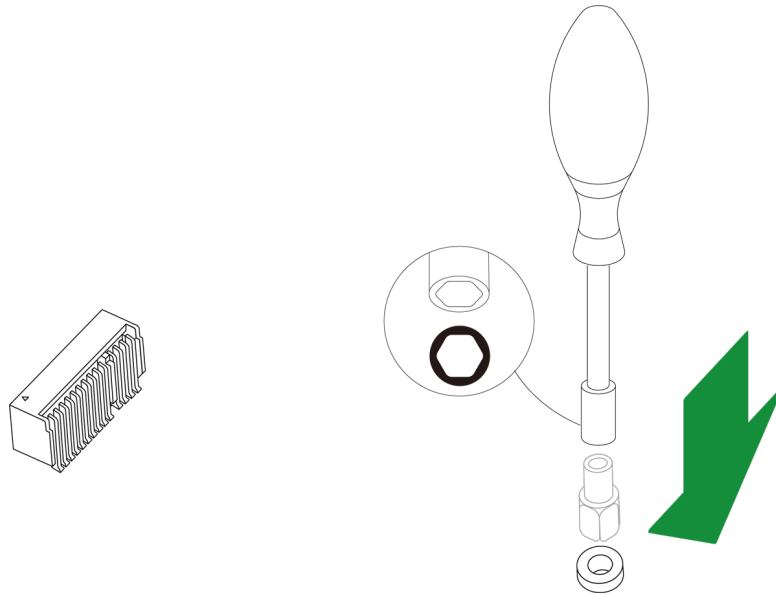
Securing the M.2 Heatsink Assembly
